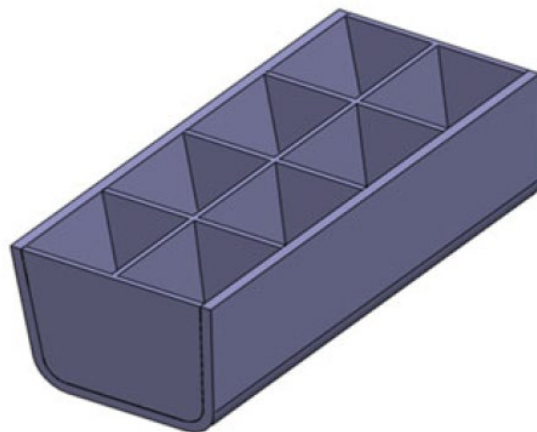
Press and injection hybrid molding product⁷⁴.
